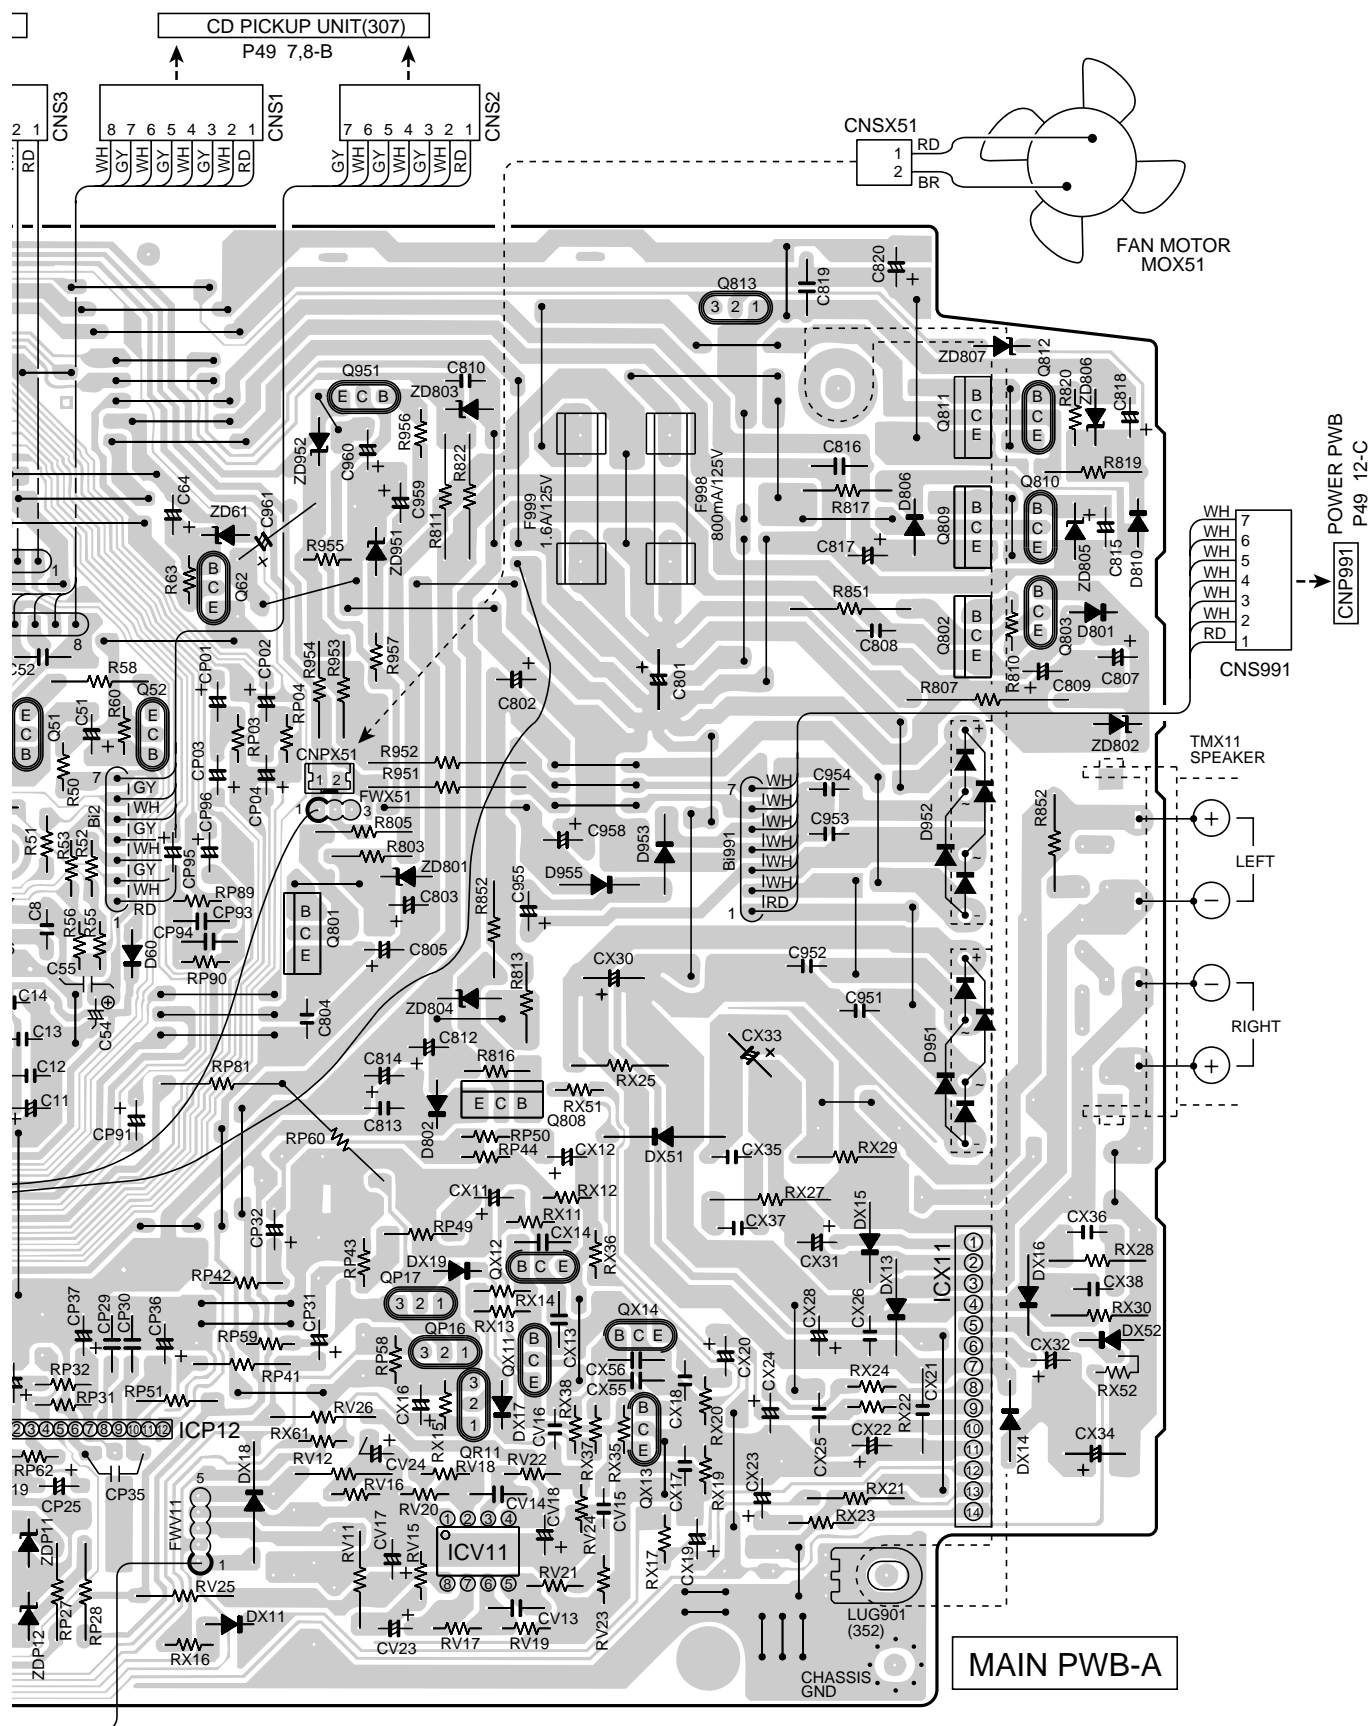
WIRING SIDE OF P.W.BOARD (4/8)
